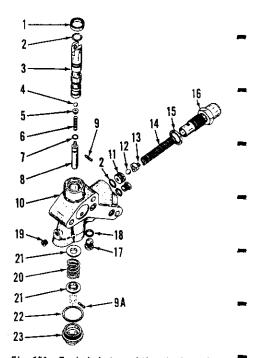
Exploded view of the single acting independent auxiliary valve used on Series 384.
